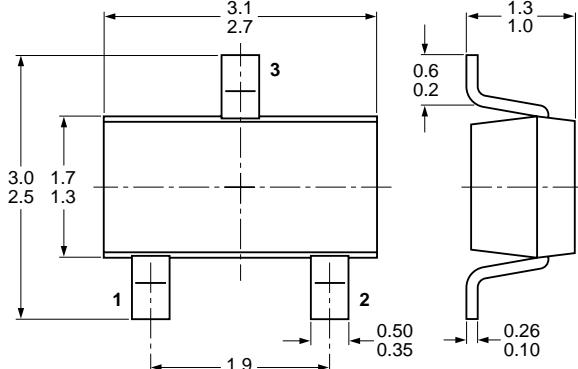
Package outline SOT346 (SC-59A/TO-236)
